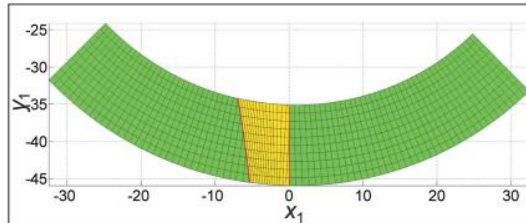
Surface of the wormwheel tooth flank in globoid worm gear
